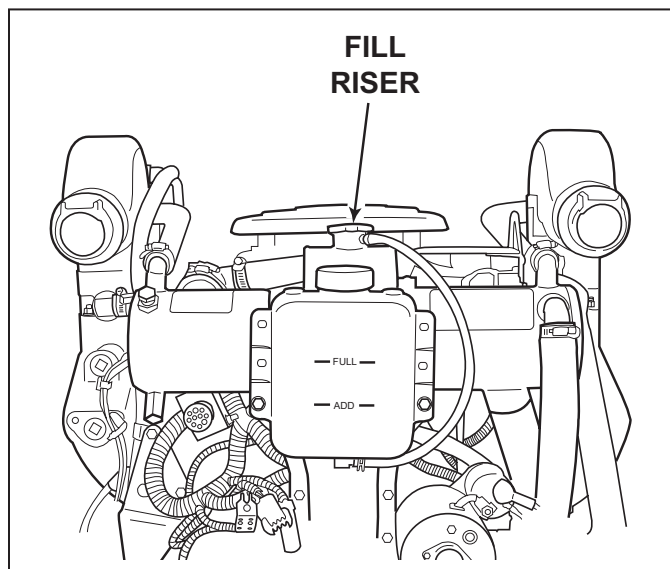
F.W.C. Fill Riser Location (Typical)
